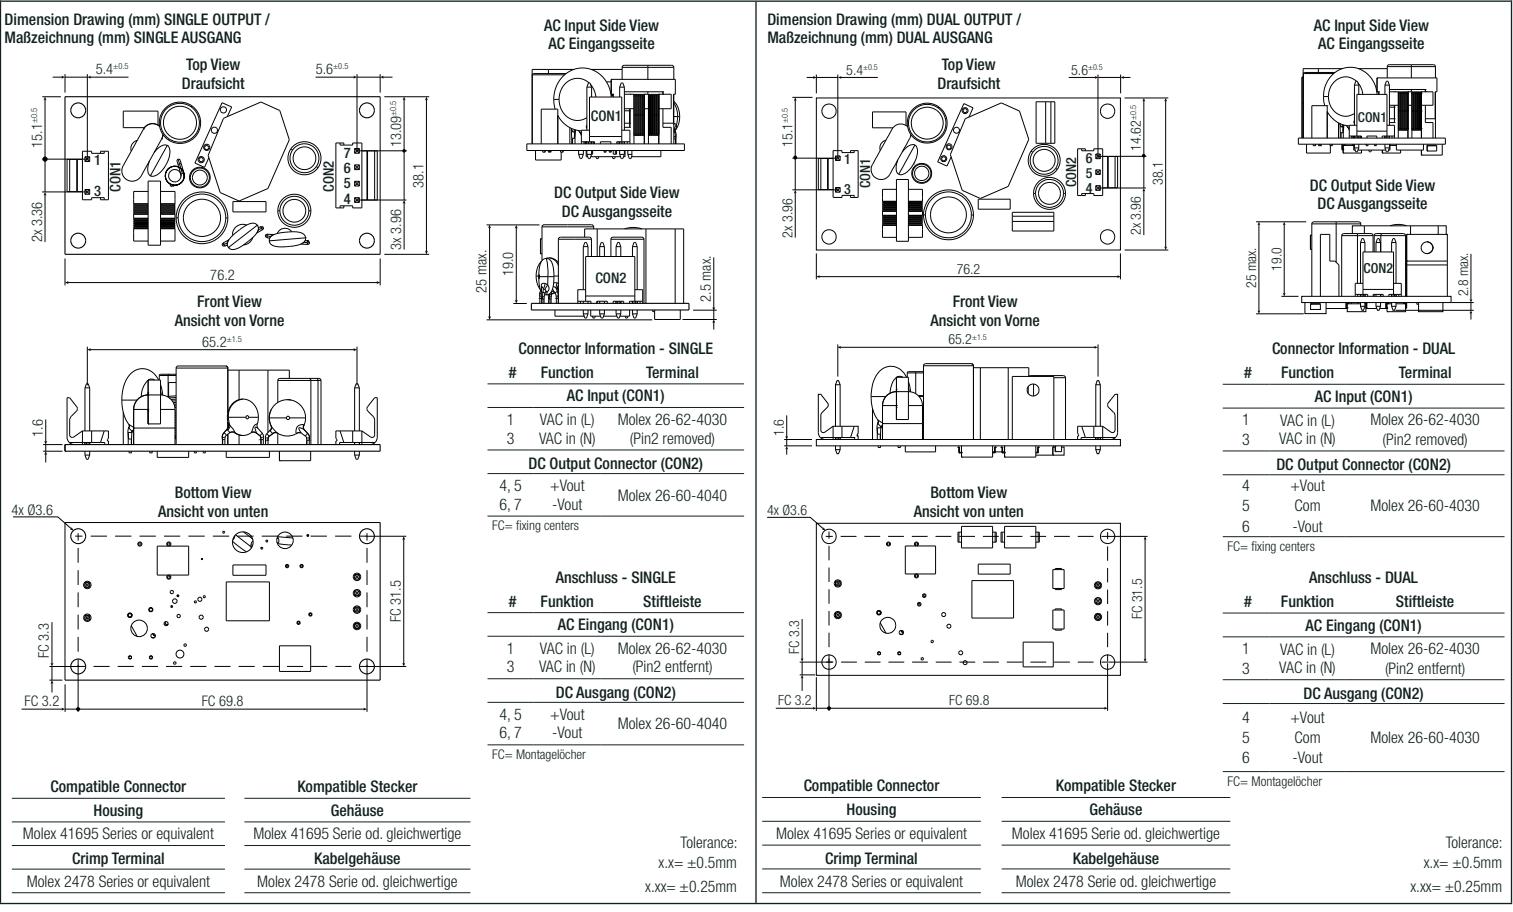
Mechanical Dimension / Mechanische Dimensionen [mm]
